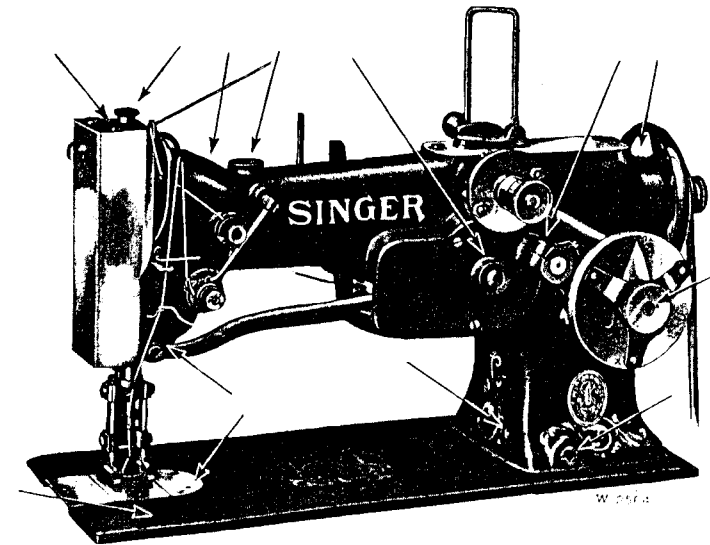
OILING POINTS AT THE FRONT OF THE MACHINE
